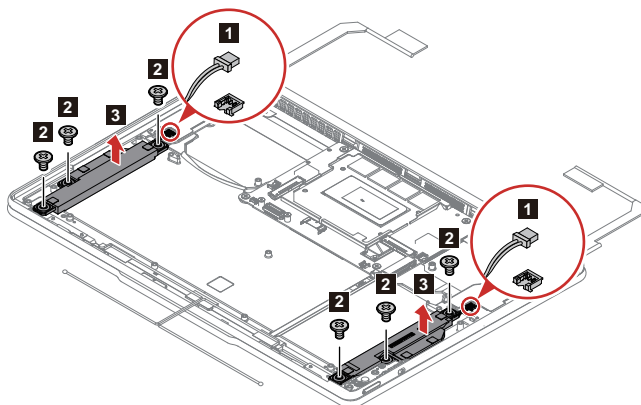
Detach the speaker cables, remove screws and remove the speakers
